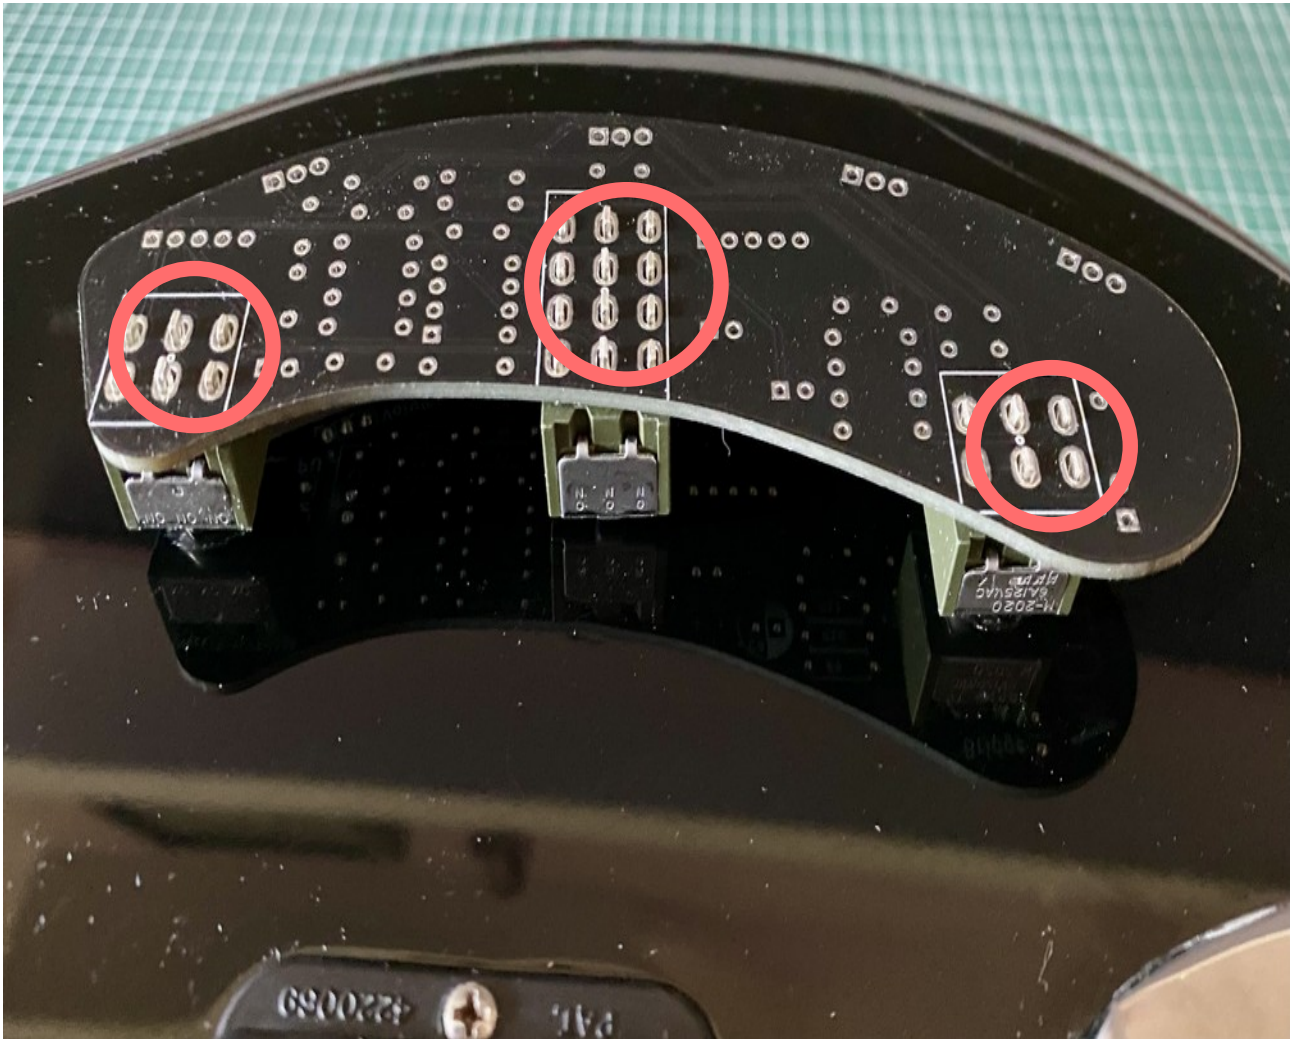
arrange PCB on toggle switch pin, make sure the toggle switch pins align with corresponding PCB cutouts.
